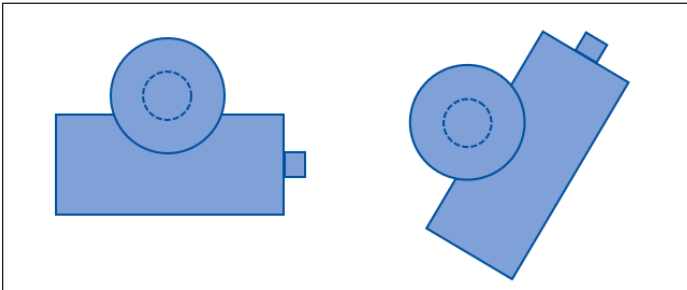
Single Gear Bleeding Procedure - Shaft Above Piston Cylinder
